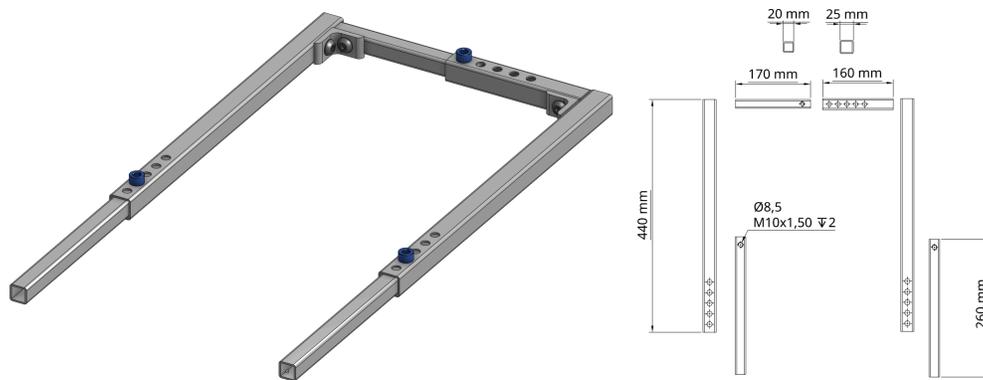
Image of Preliminary Telescoping Frame in CAD and Drawing.
